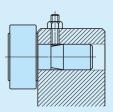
Mounting examples of Easy Mounting Type Cam Followers
